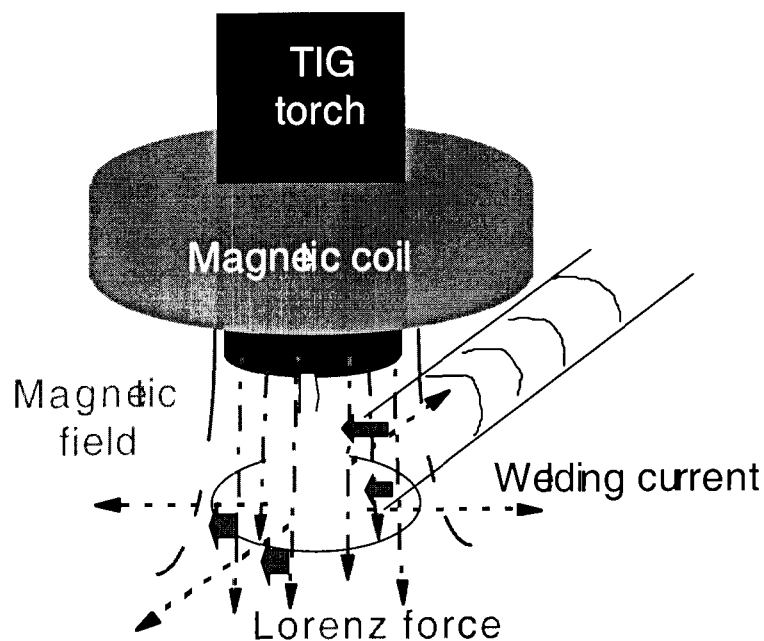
Magnetic stirring during TIG arc welding
